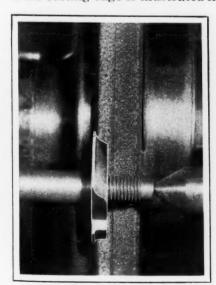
Finish-grinding a Formed Carboloy Tool with a Formed Wheel
